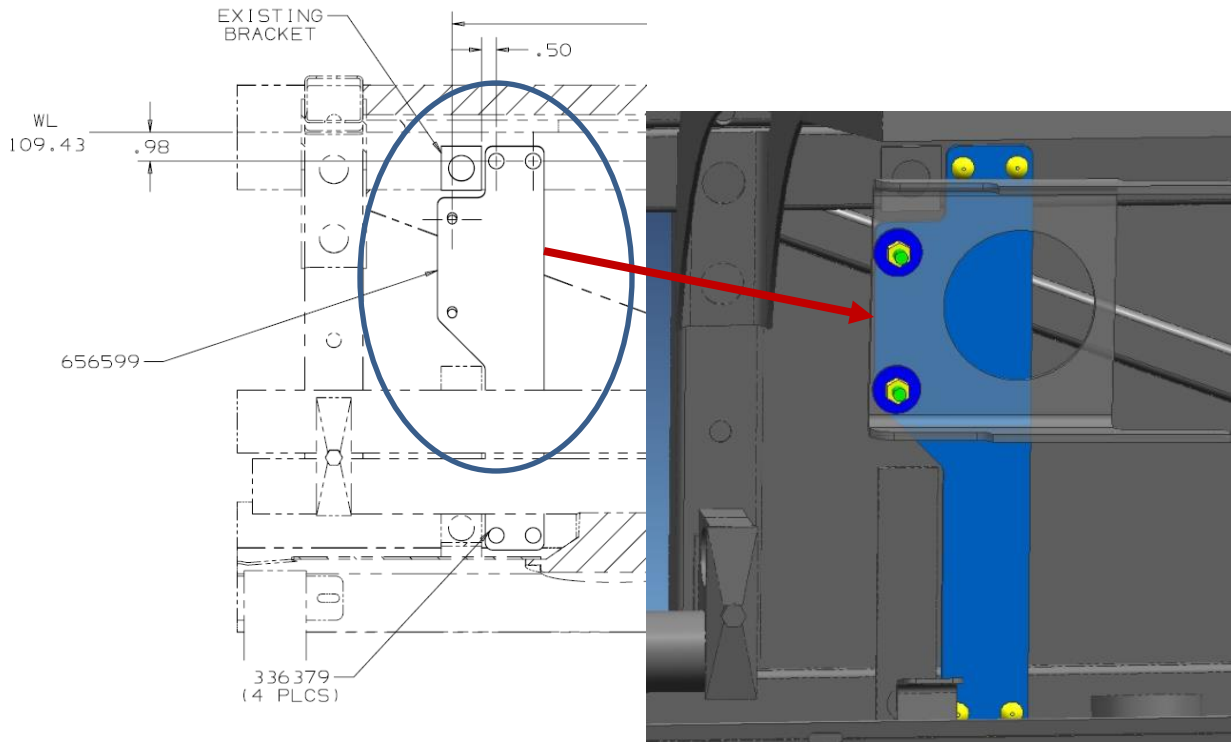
A: SHOWN A VIEW OF DETAIL A. REFER TO DIMENSIONS FOR MOUNTING OF THE FRONT BRACKET
